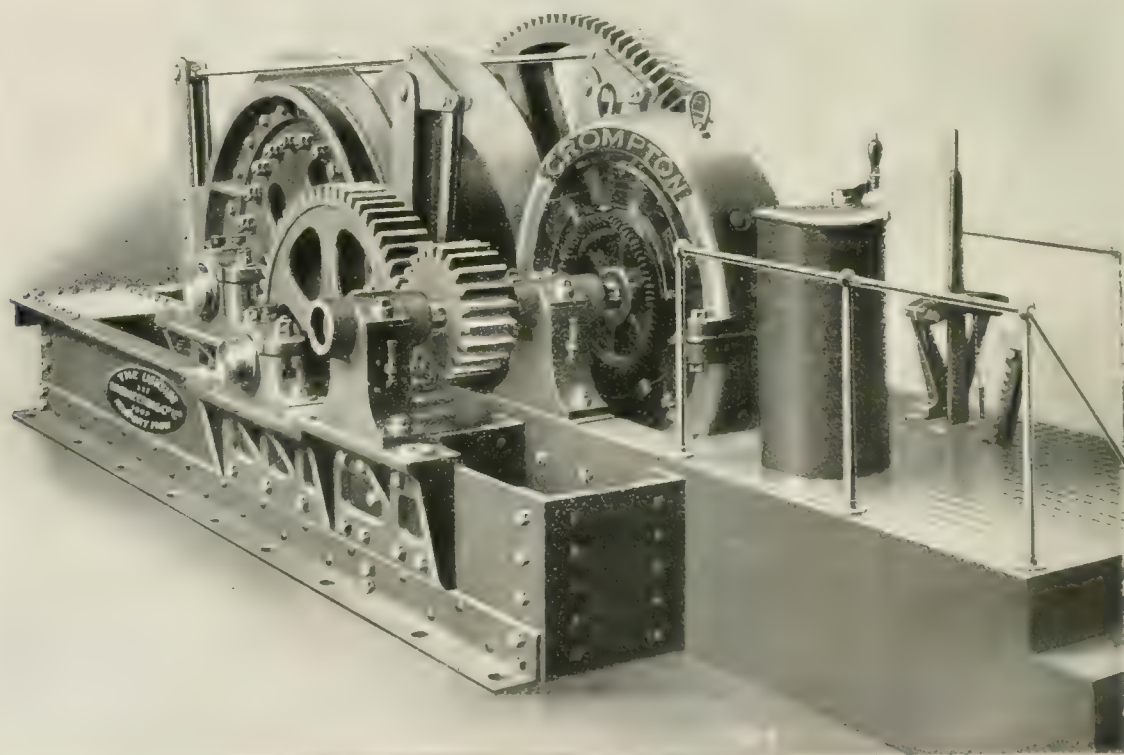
200 H.P. CROMPTON MOTOR COUPLED TO HAULAGE GEAR.
